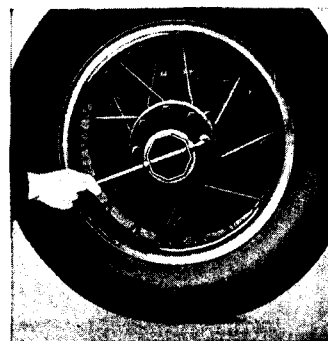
To mount a wheel simply set it up on the hub and start the cap screws by hand. Then tighten the screws with the wrench, but do not tighten them in rotation. After tightening one screw, tighten the screw directly opposite.
